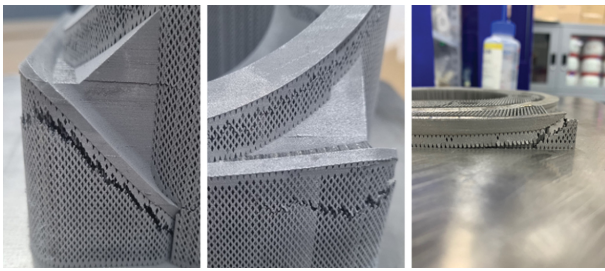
Fracture of support during PBF type metal additive manufacturing.
